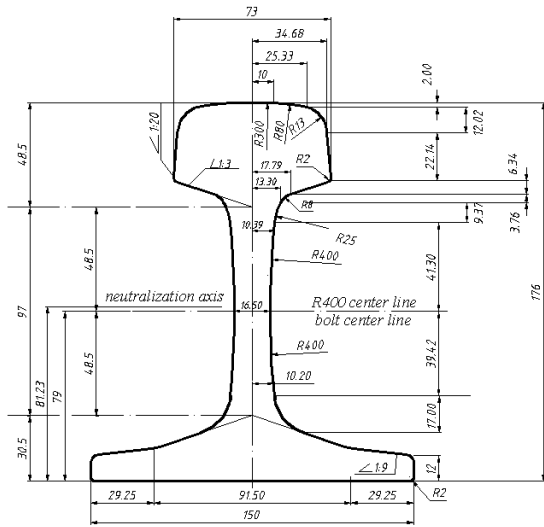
60kg/m-section shapes of heavy rail dimensions
